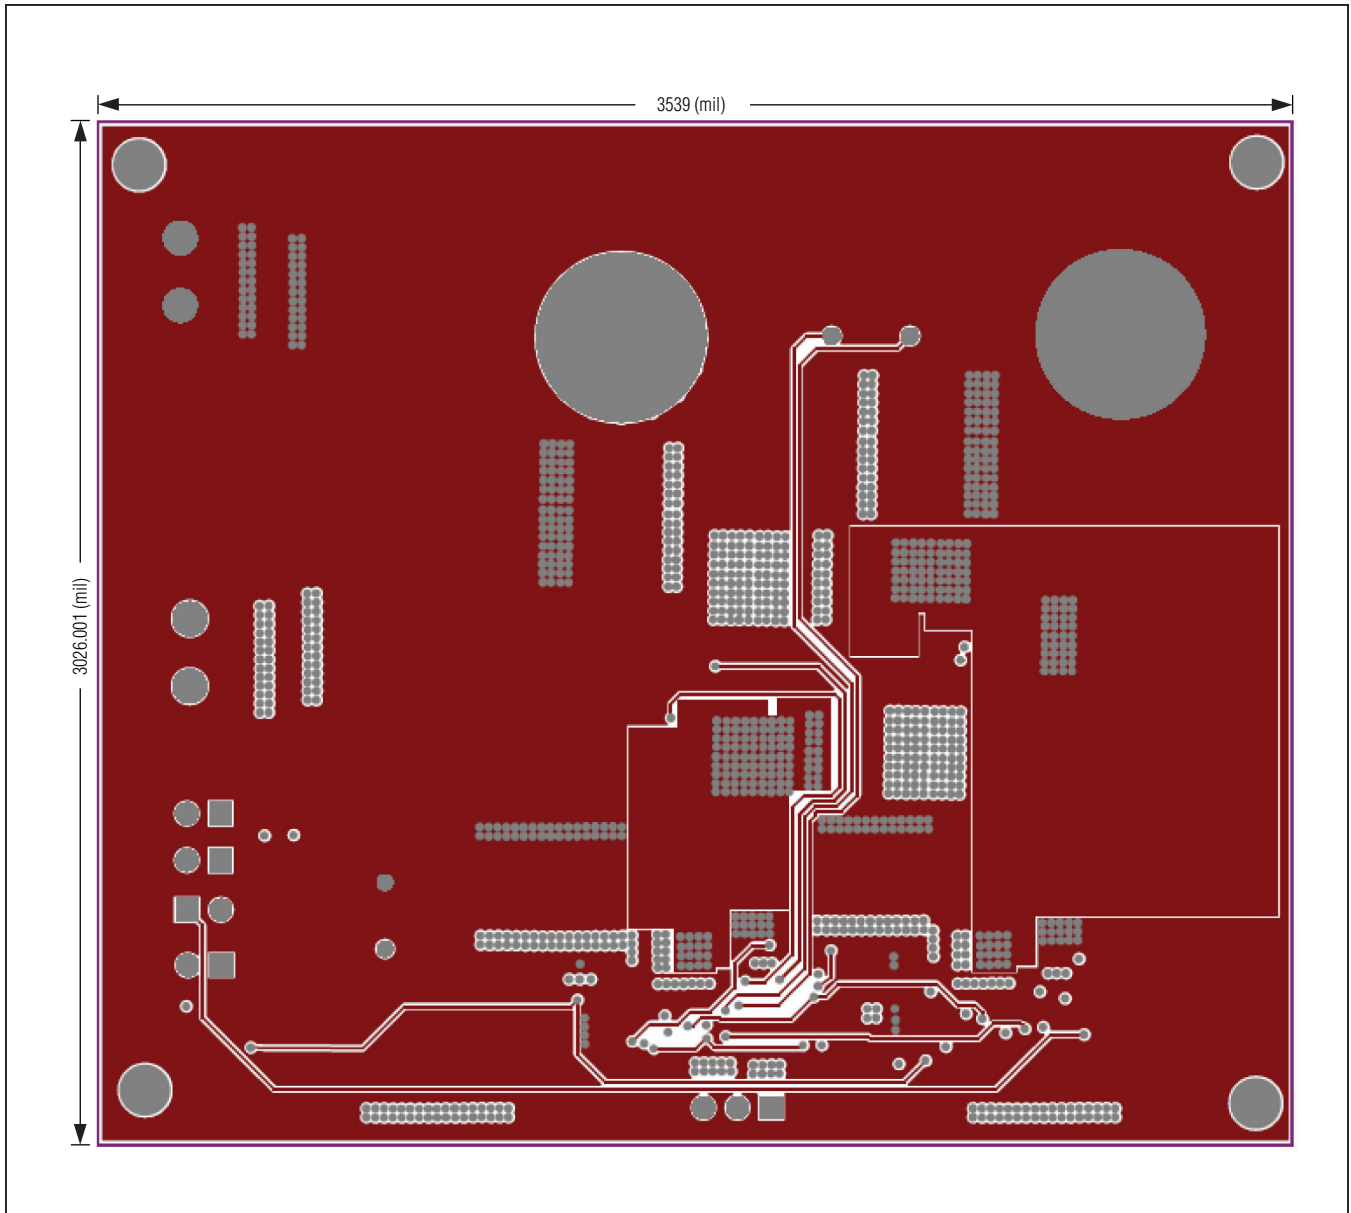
MAX8686 EV Kit PCB Layout—Layer 2 (GND)
